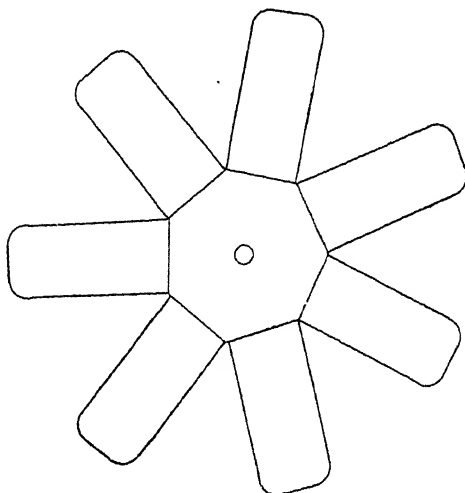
RADIAL 7 CYLINDER TYPE.
